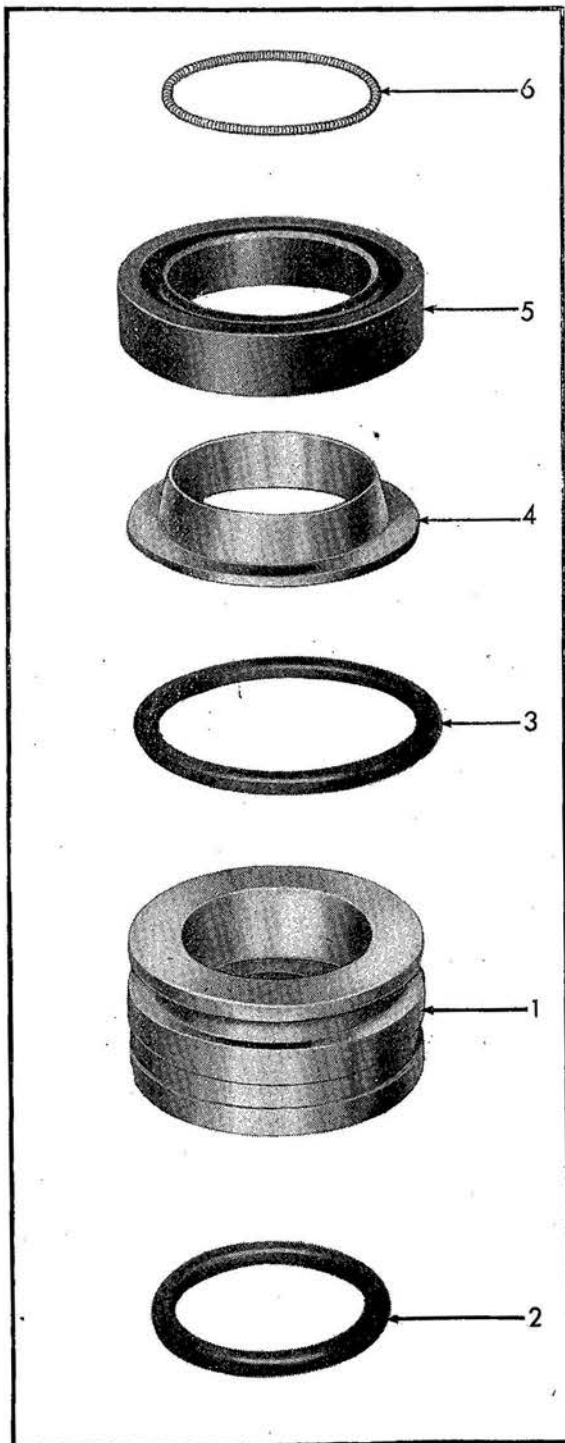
Sequence of Reassembly of Shaft Seal Assembly
